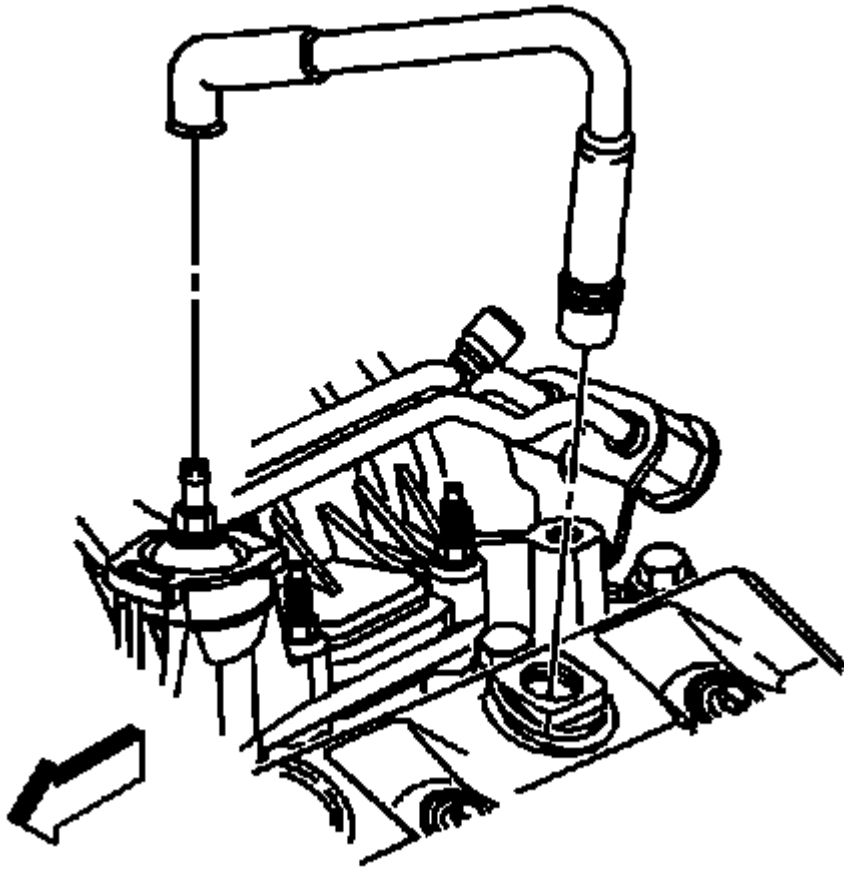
Locating PCV Valve Hose At Valve & Rocker Cover
